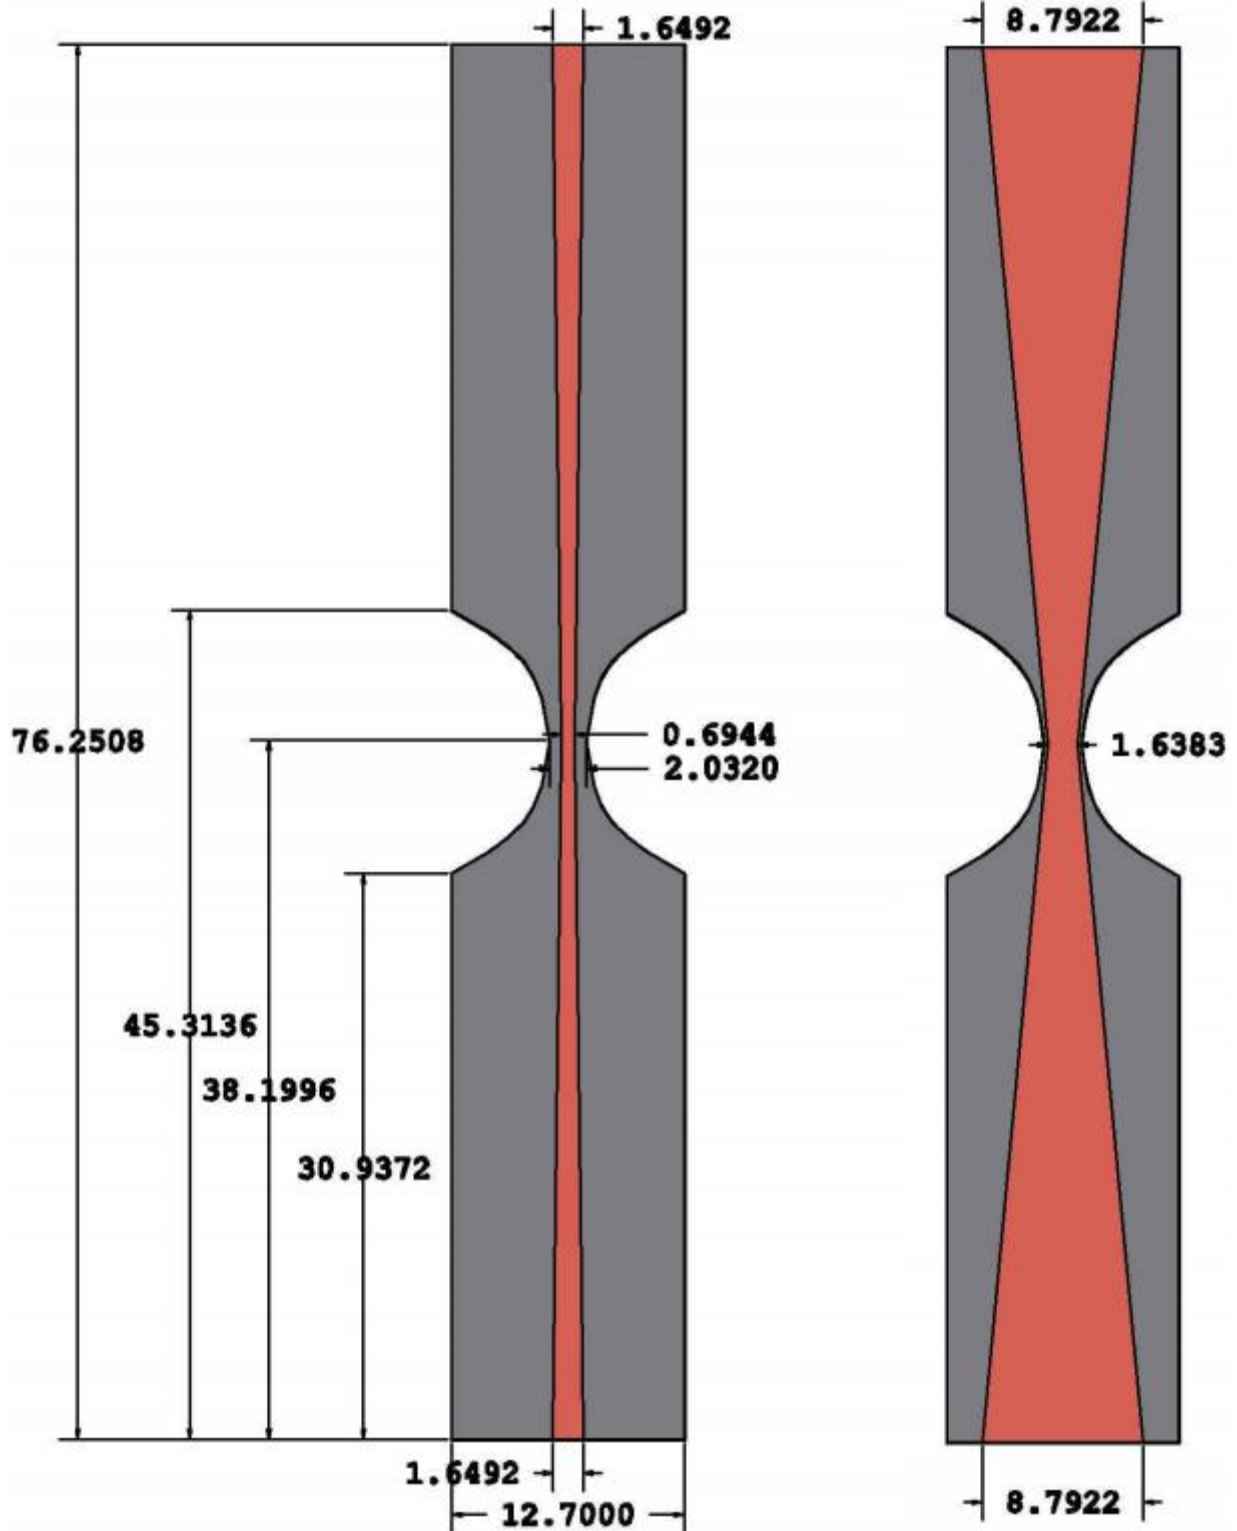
Top and bottom view of back to back balun used for measurement and simulation verification showing dimensions in mm
